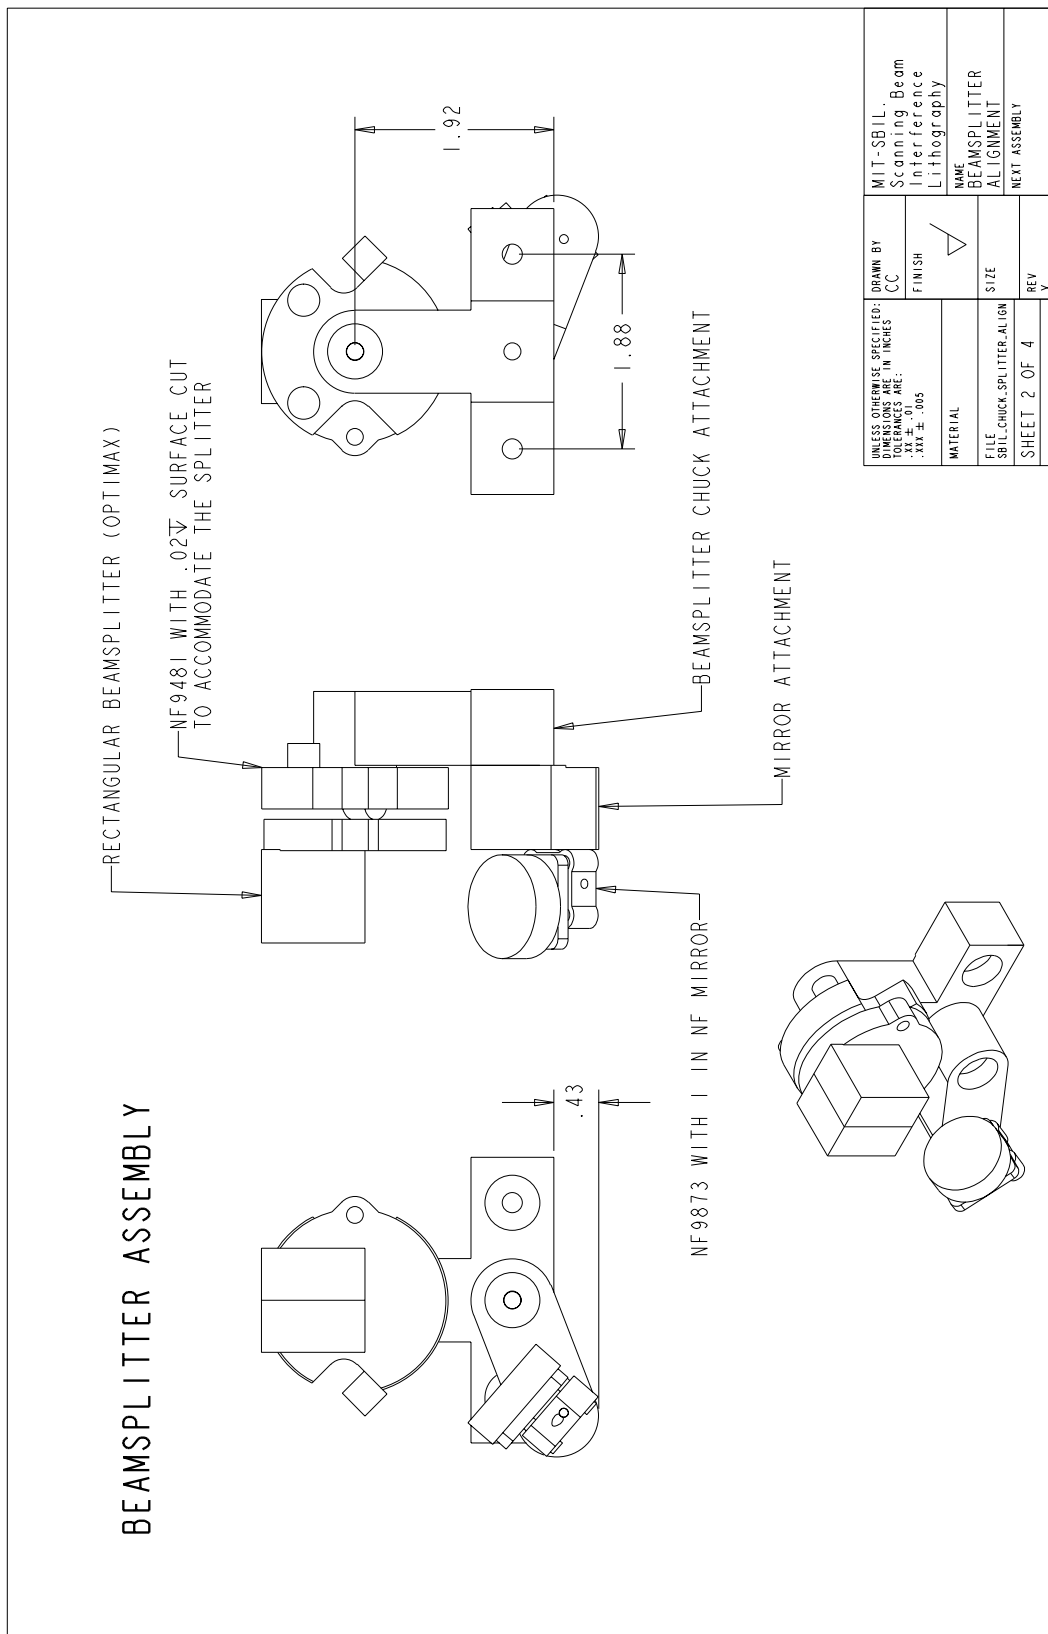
Drawing of the rectangular beamsplitter assembly.
